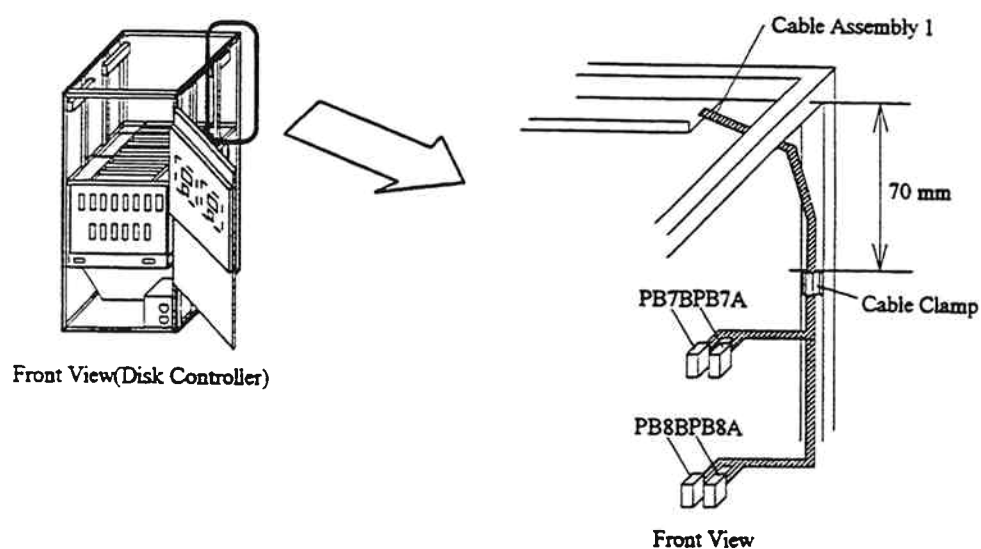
Removal of the Cable Assembly 1
